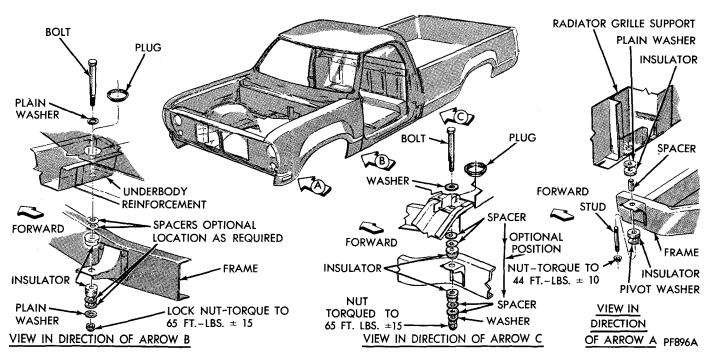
Front End and Cab Hold Down Mounting (D-W 1-2-3)
